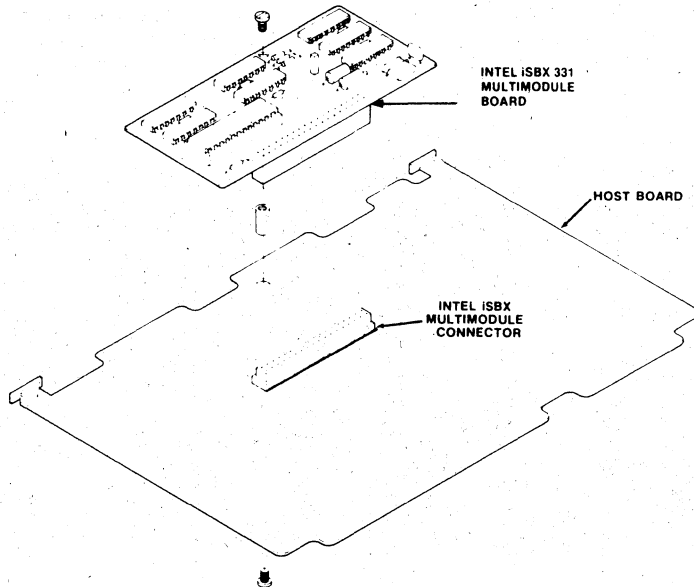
Installation of iSBX™ 331 Module on a Host Board
